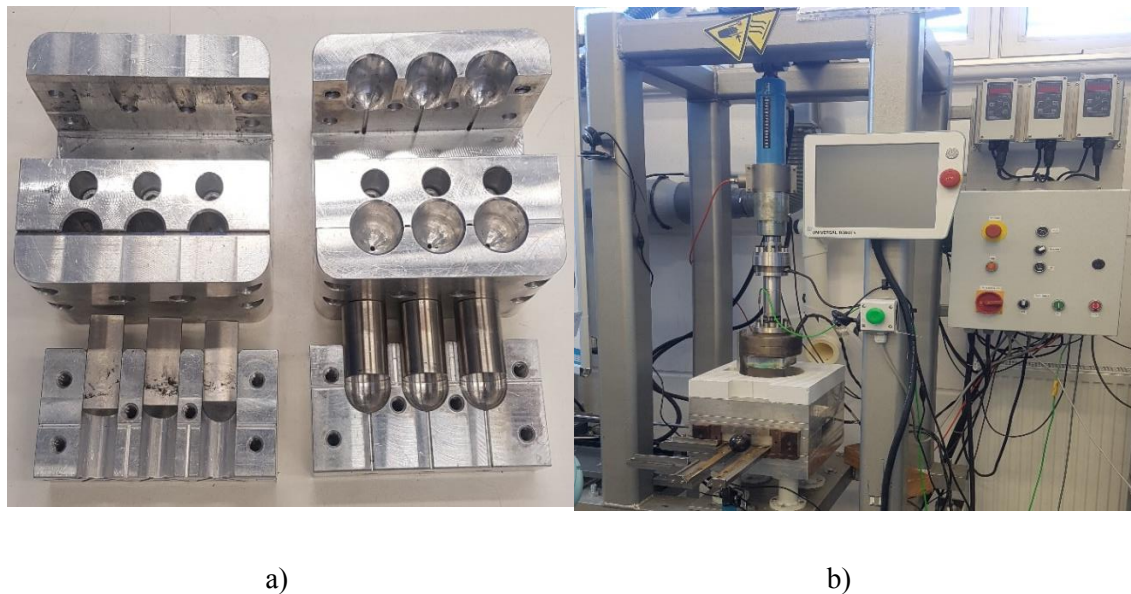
a) The molds for the samples and b) the rubber molding machine
